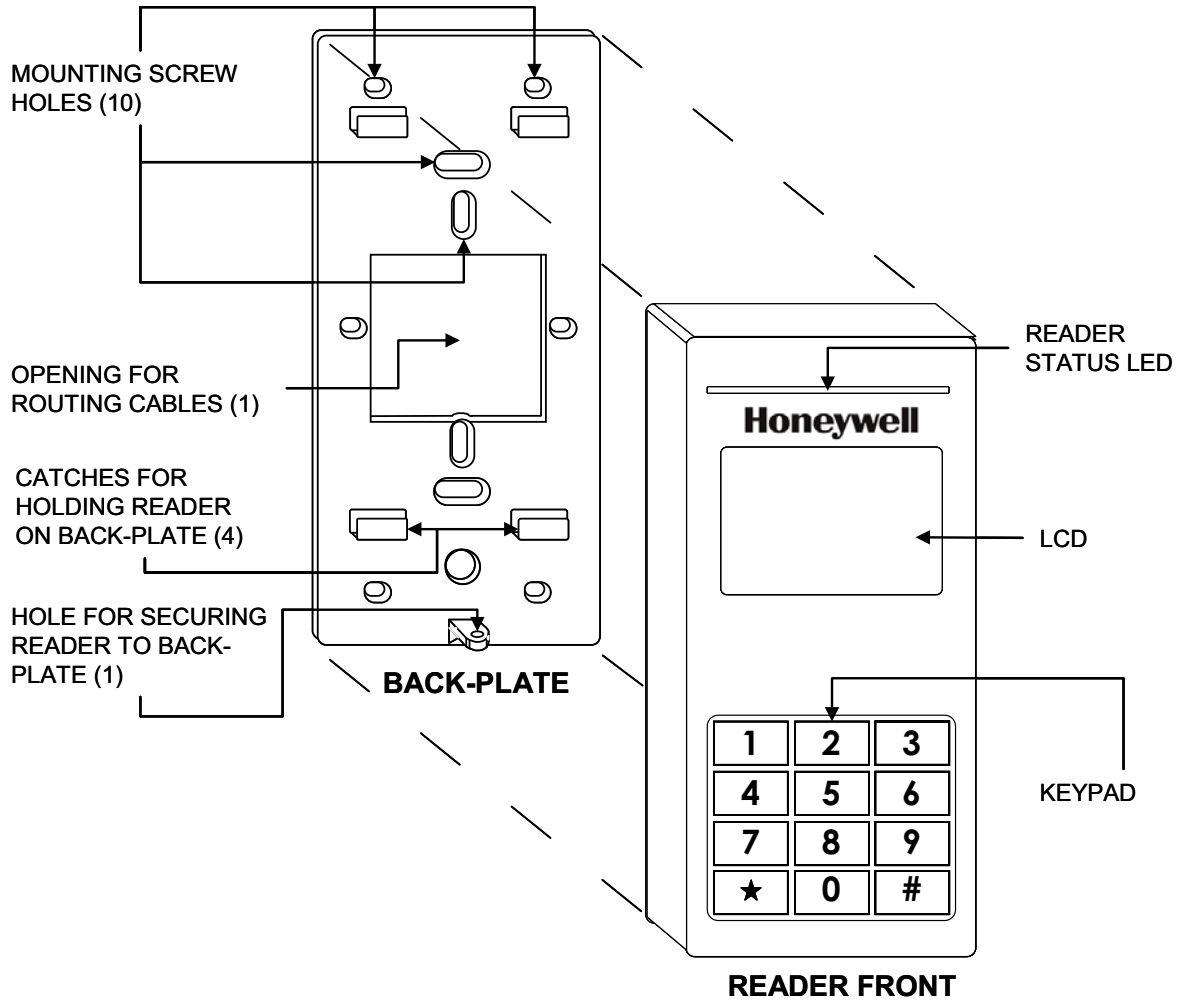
Parts of IdentIPoint reader - Front of reader and Back-plate
